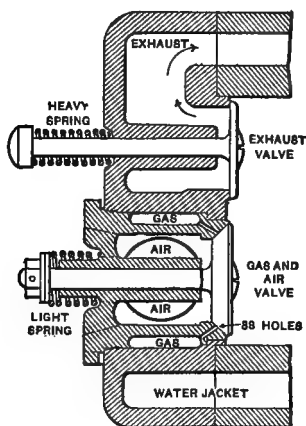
Sectional View of Combustion Chamber, Showing Arrangement of Valves In Cylinder Head.
